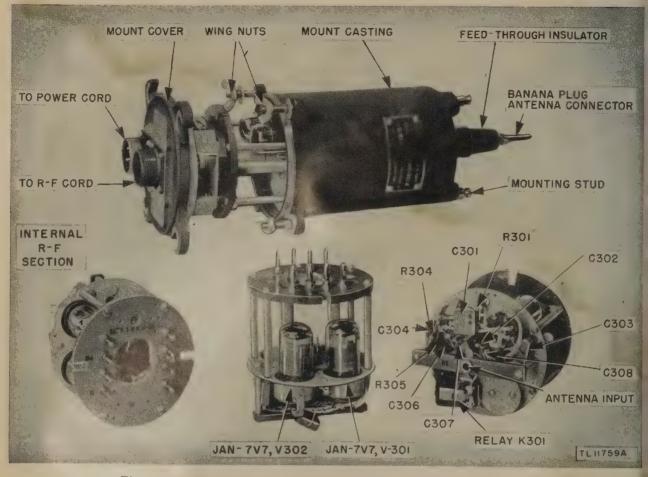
Phase Inverter MC-411-A, assembly and placement of parts.
